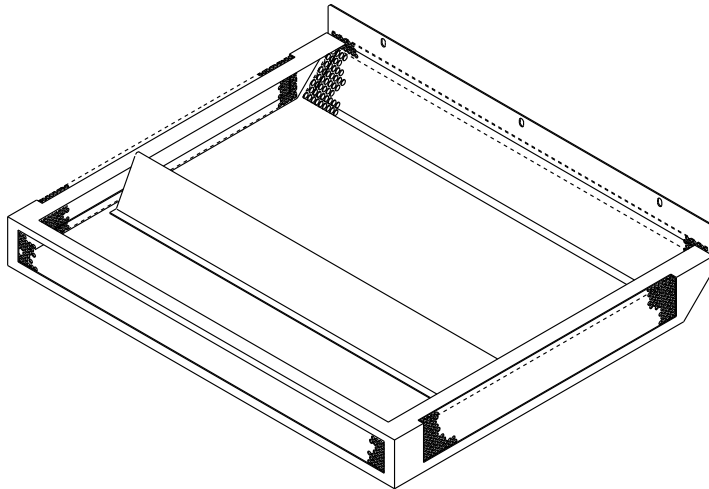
Front Ground Plate Assembly (PN 03F4617)
